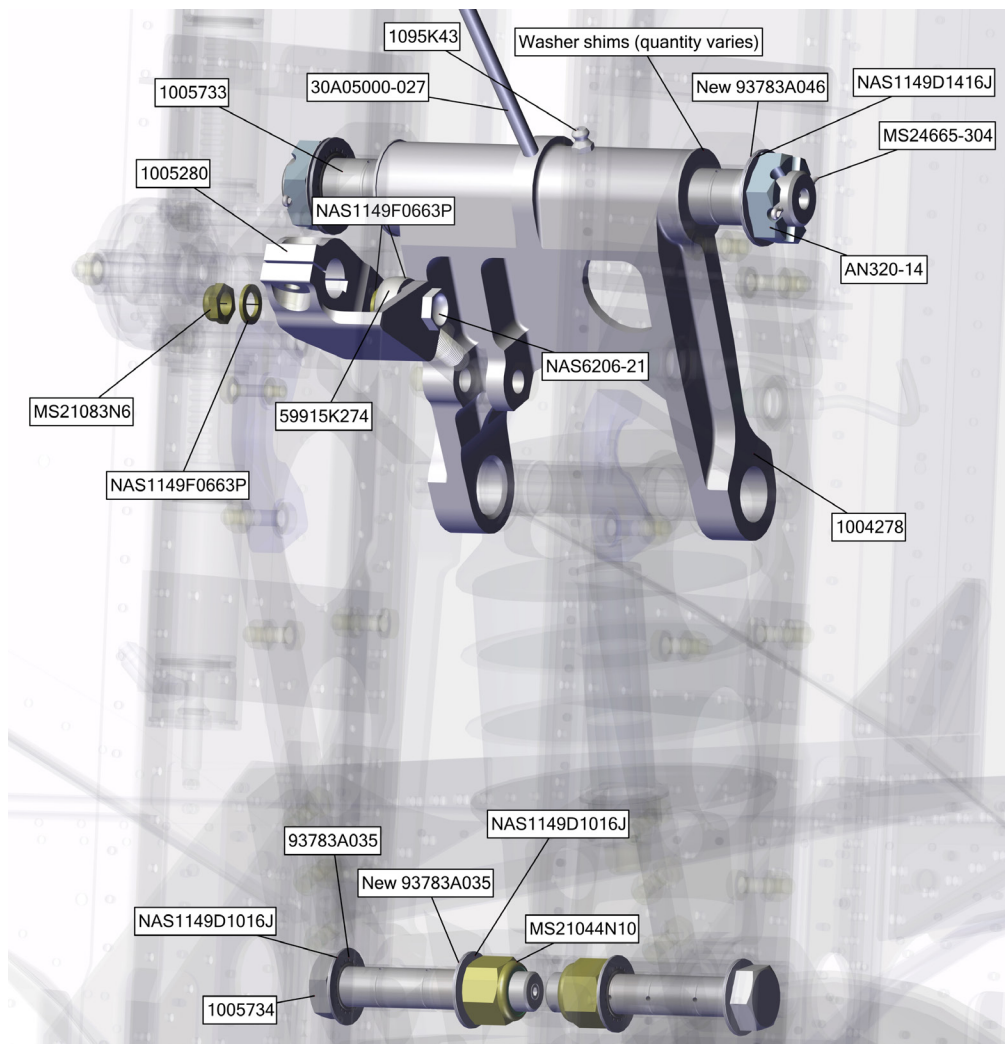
UPPER AND LOWER SHOCK PIVOT PIN ASSEMBLIES REASSEMBLY
